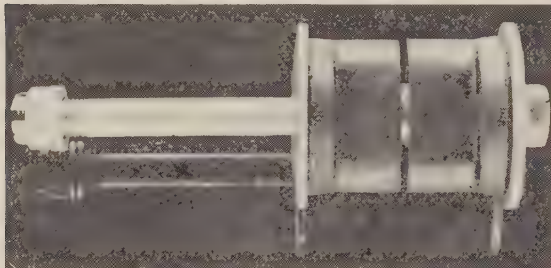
STANDARD ENGINE MOUNTING UNIT FOR AT-6C AIRPLANE
